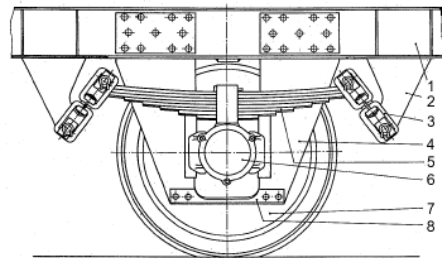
The single-axle running gear used on two-axle freight wagons. 1) Carbody 2) Suspension bracket 3) UIC links 4) Axle guidance 5) Leaf spring 6) Axle bearing 7) Wheelset 8) Connecting bar.
